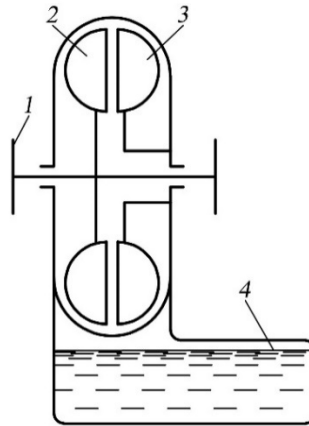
Diagram of hydrokinetic retarder: 1 – shaft, 2 – rotor, 3 – stator, 4 – oil tank
